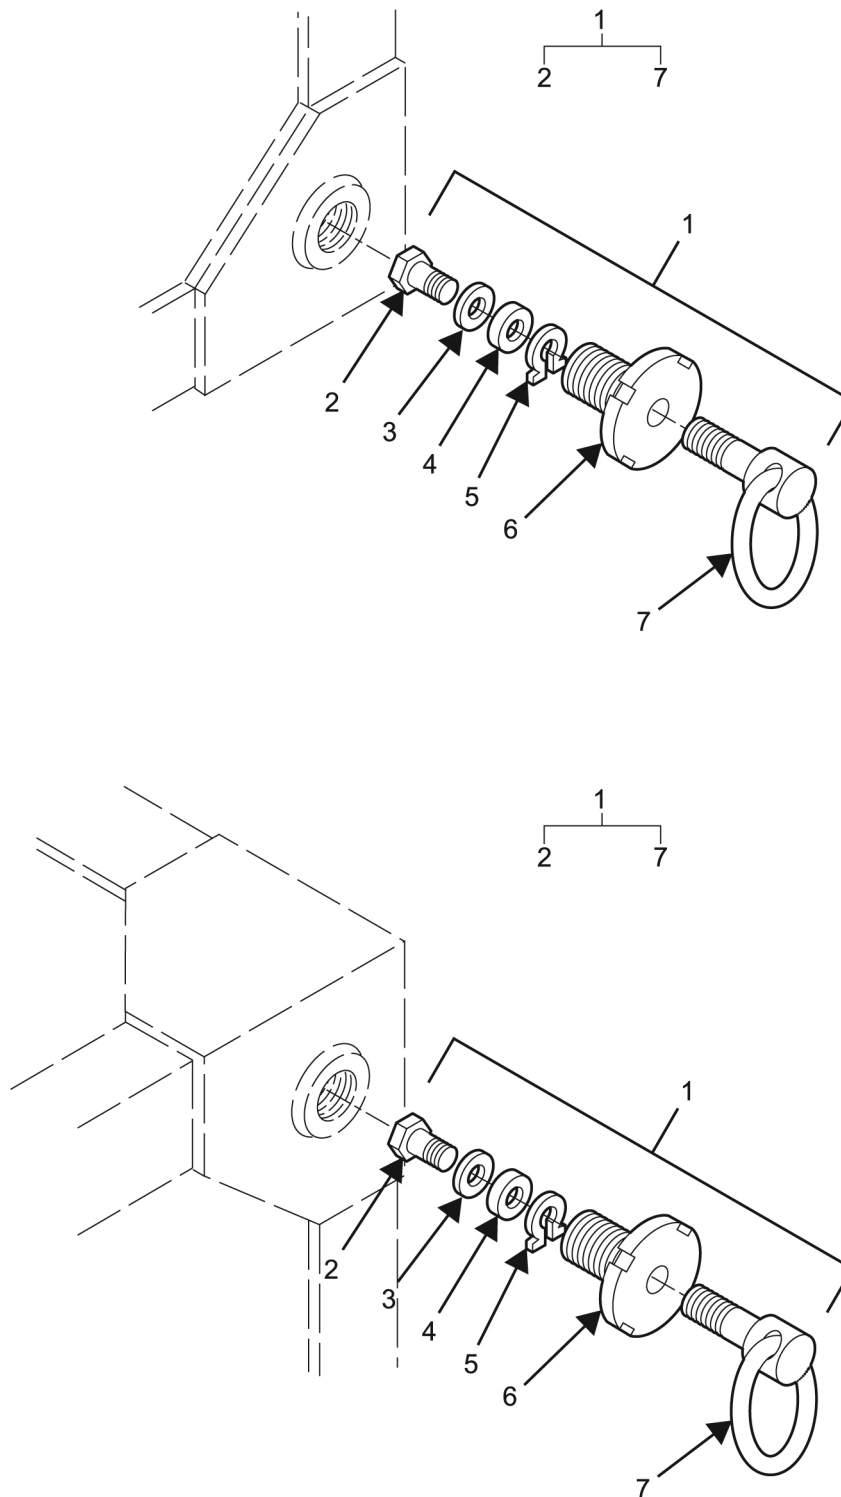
Towing Eye Assembly (Top); Lifting & Tiedown Eye Assembly (Bottom).
